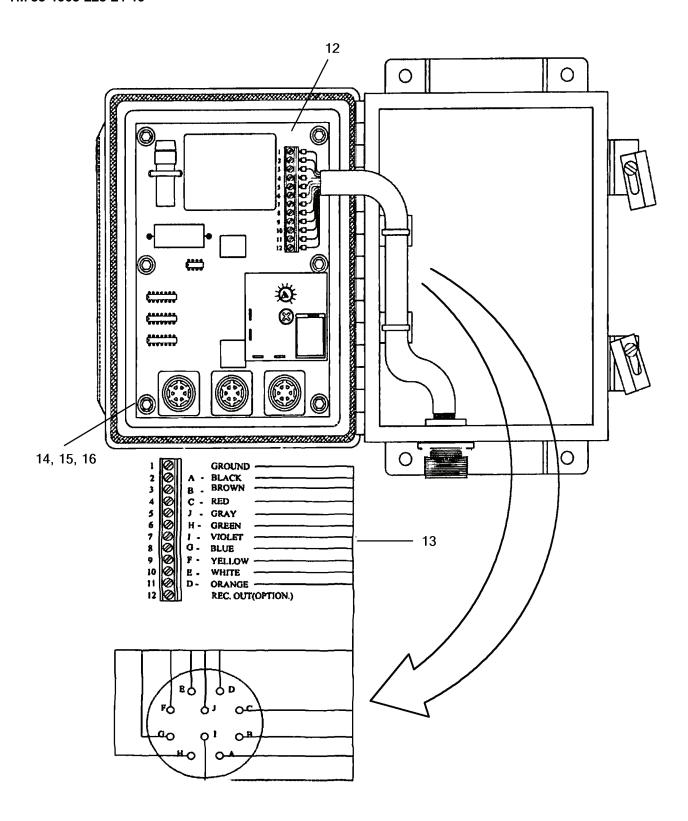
Remote Indicator (Alarm) Assembly (Sheet 2 of 2).
